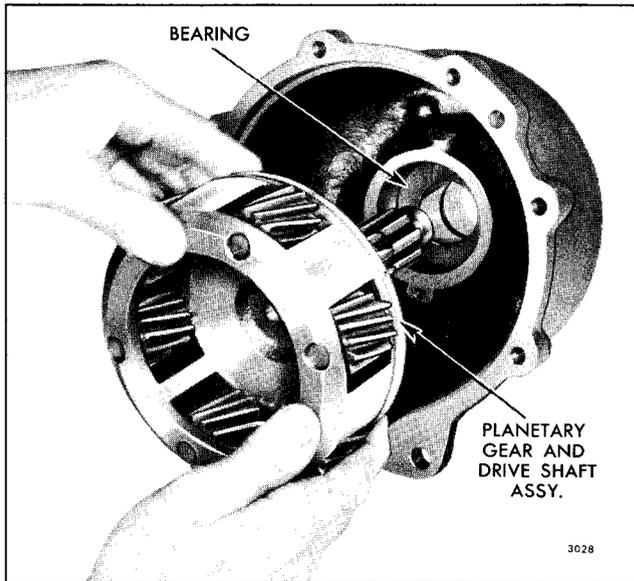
Installing Reduction Gear Drive Shaft and Planetary Gear Assembly in Gear Housing (2.5:1 and 3:1 Ratios)
